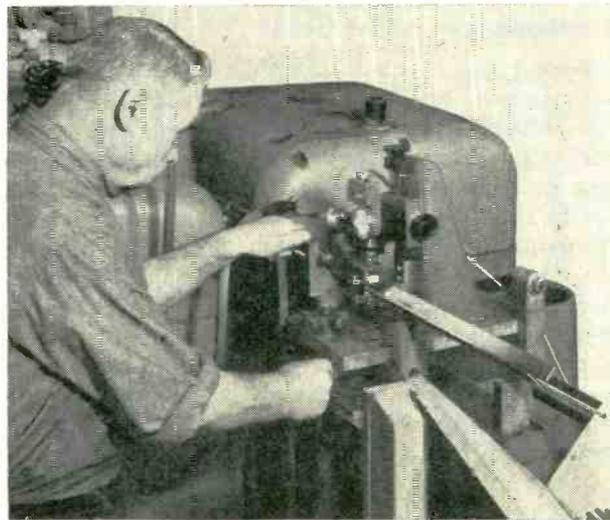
Gage mounted on centerless grinder continuously monitors output of production machine
